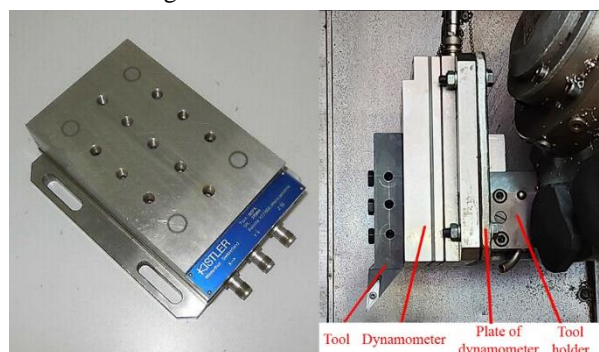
a) The 3-axis Kistler 9257A dynamometer, b) specially designed holder of dynamometer
